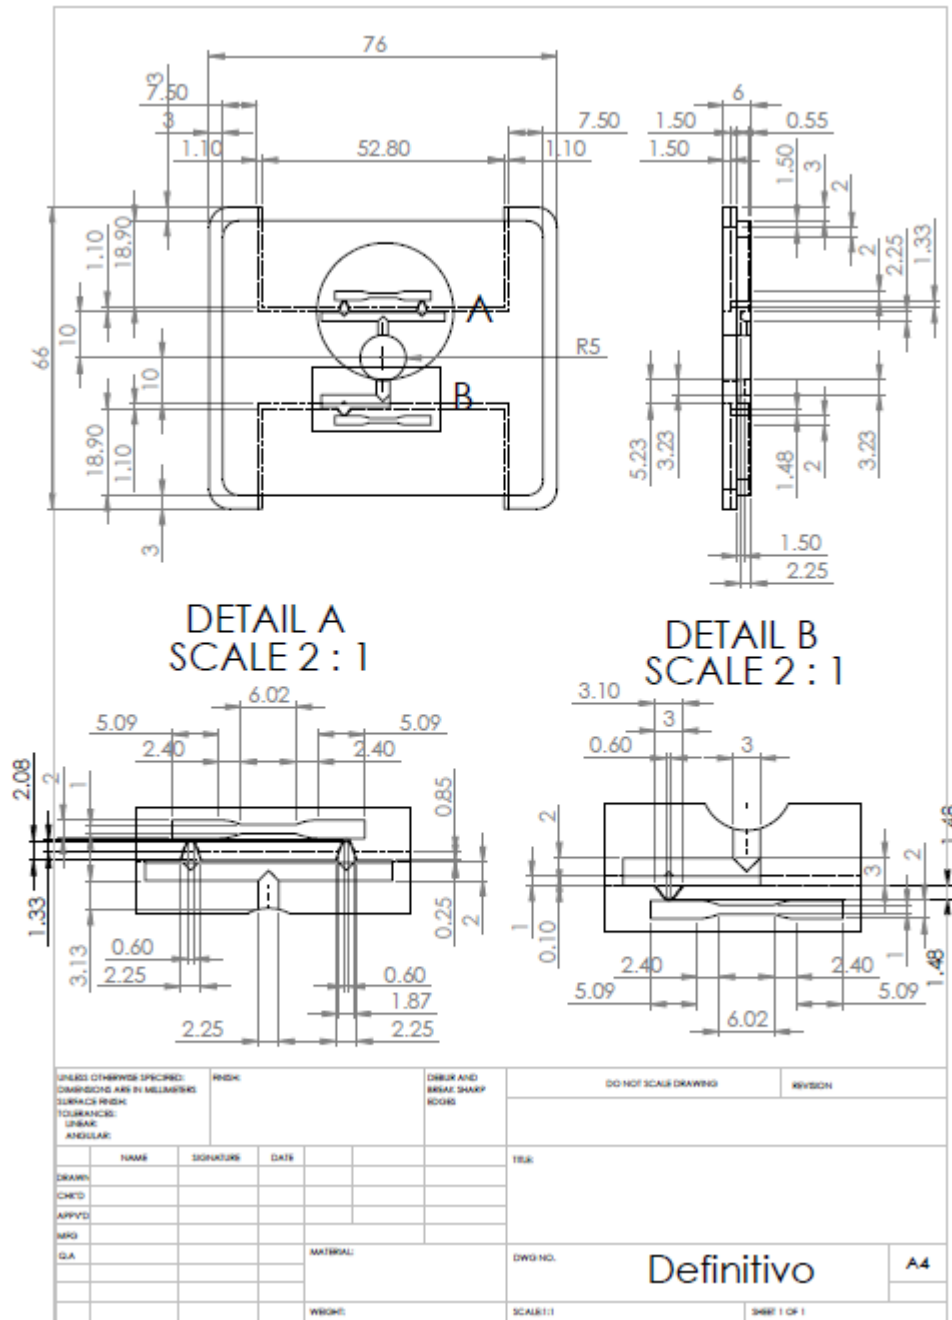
Technical drawing of the cavity insert without the open-close compartments.
